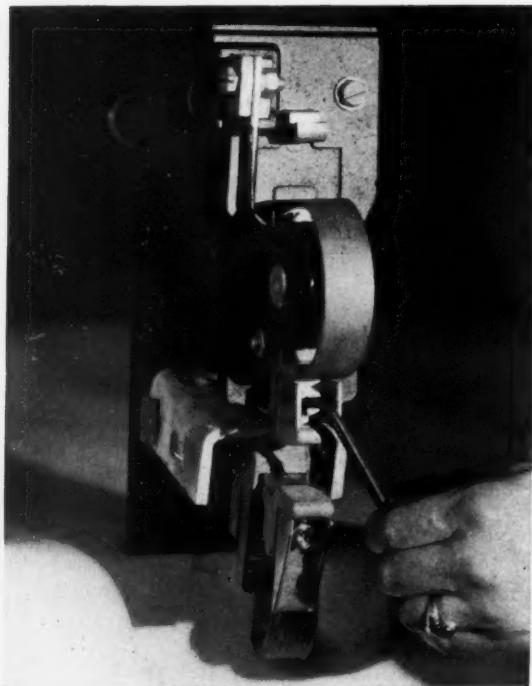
Space is saved holding insured by hollow screws in Westinghouse type SM contactor
